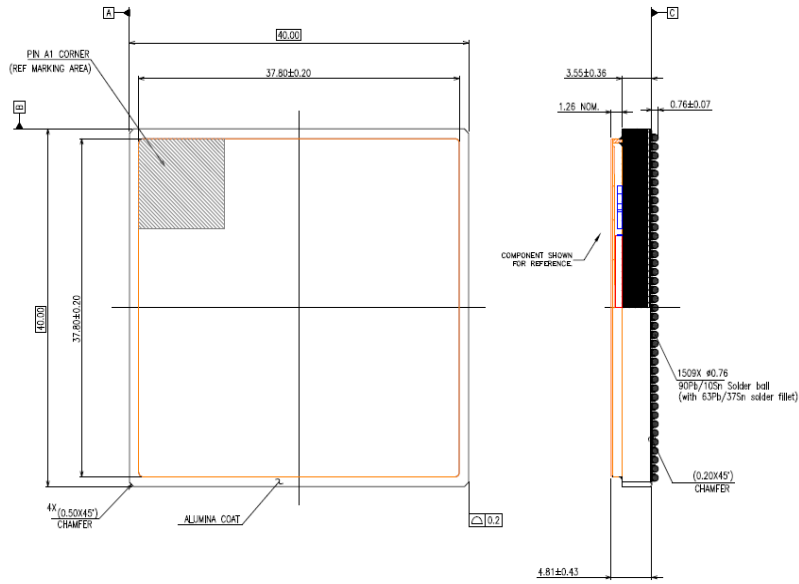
RTPFS460ZT-CB1509 Package Bottom-View
